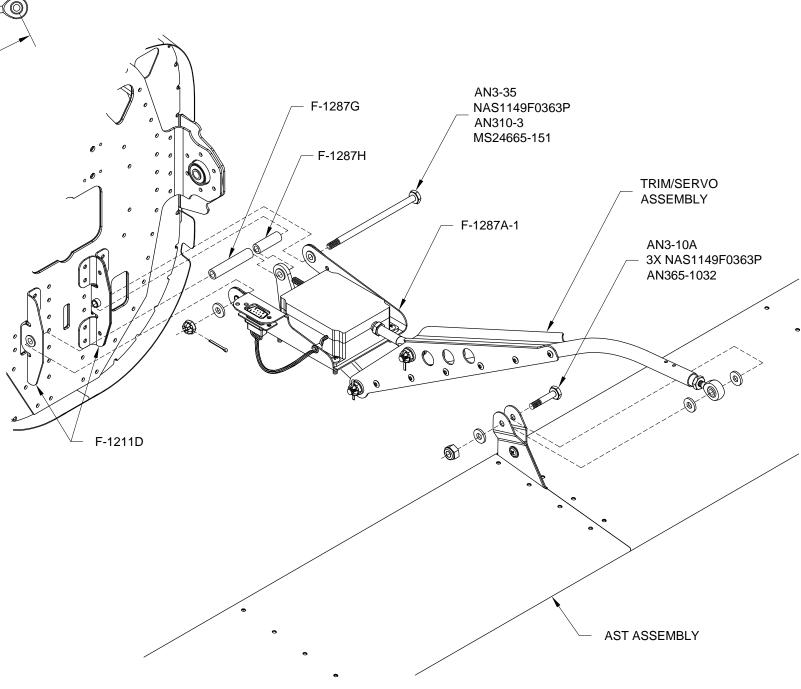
TRIM/SERVO ASSEMBLY INSTALLATION
